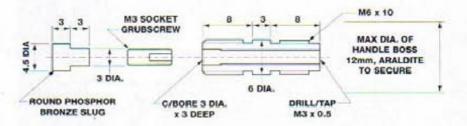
SPINDLE CLAMP CONSTRUCTION (SECTION)
